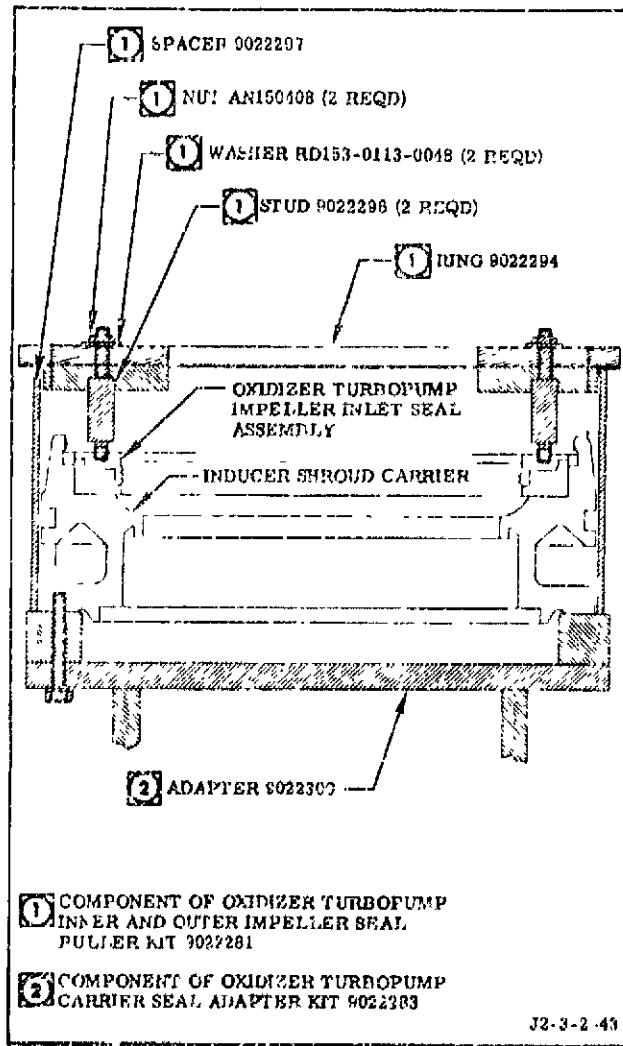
GSE Setup for Impeller Inlet Seal Assembly
